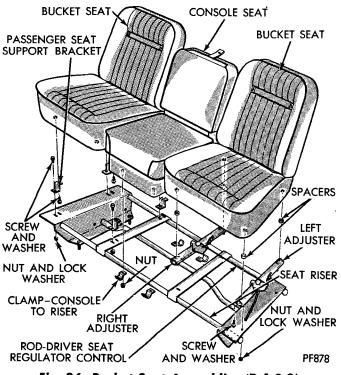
Bucket Seat Assemblies (D-1,2,3)
